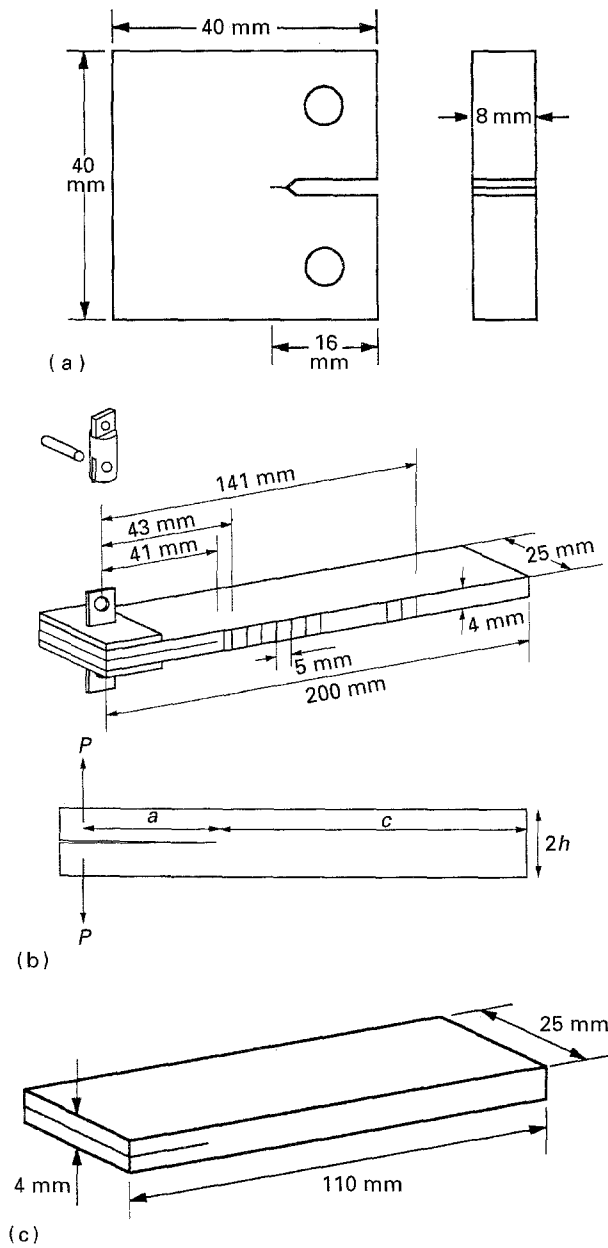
Dimensions of (a) CT, (b) DCB and (c) ENF specimens.
